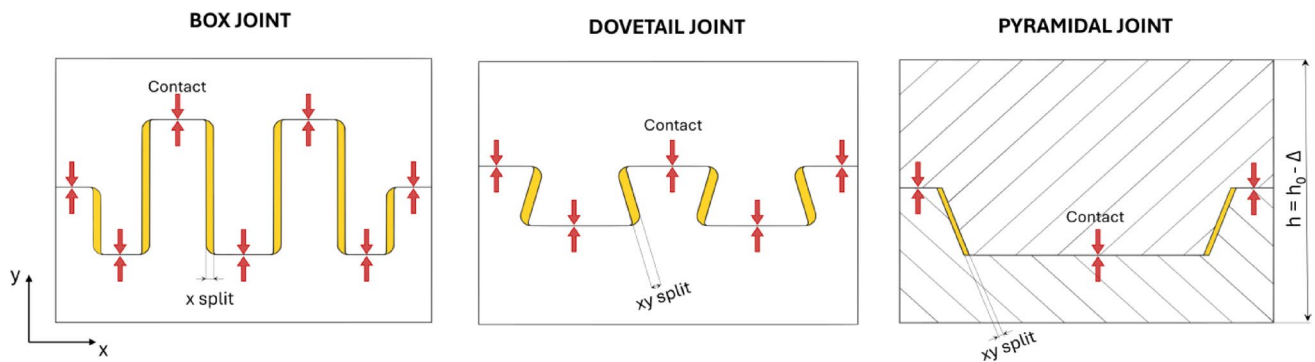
Schematic representation of the green-state assembly configuration for the three investigated joint geometries: box (frontal view), dovetail (frontal view), and pyramidal (sectioned view). The red arrows indicate the surfaces theoretically in direct contact immediately after assembly, while the yellow-highlighted regions represent the controlled split (gap) areas generated by the imposed offset Δ . In all configurations, contact occurs along the horizontal interface plane,
